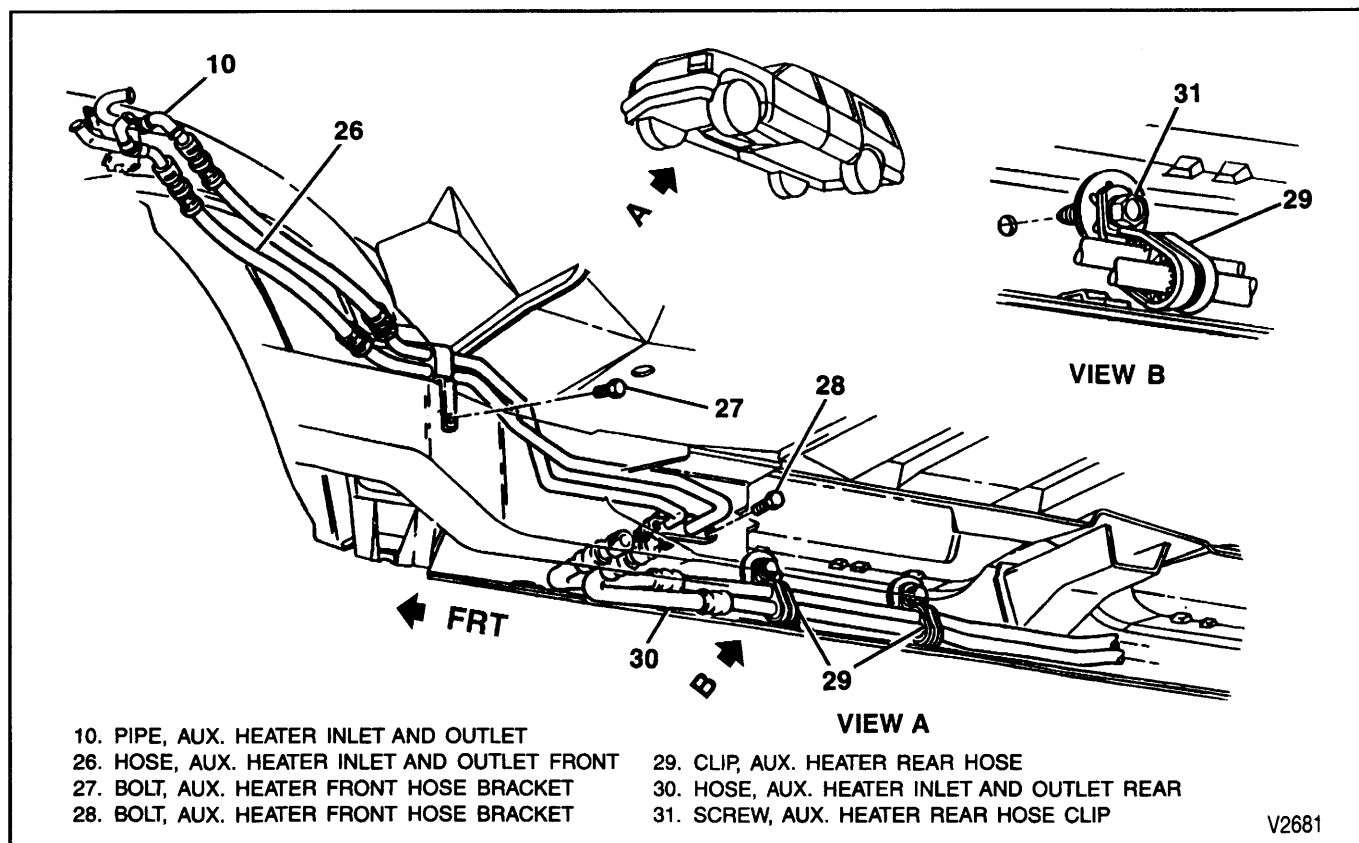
Auxiliary Heater Hose Assembly Routing (Front)
